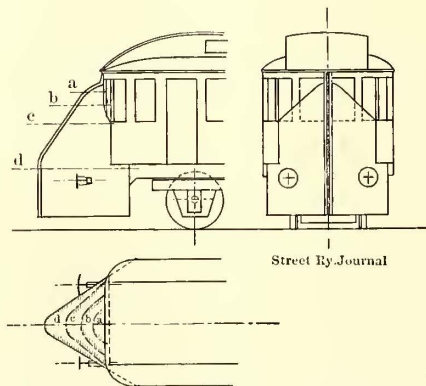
PARABOLIC SHIELD TRIED ON CAR A
